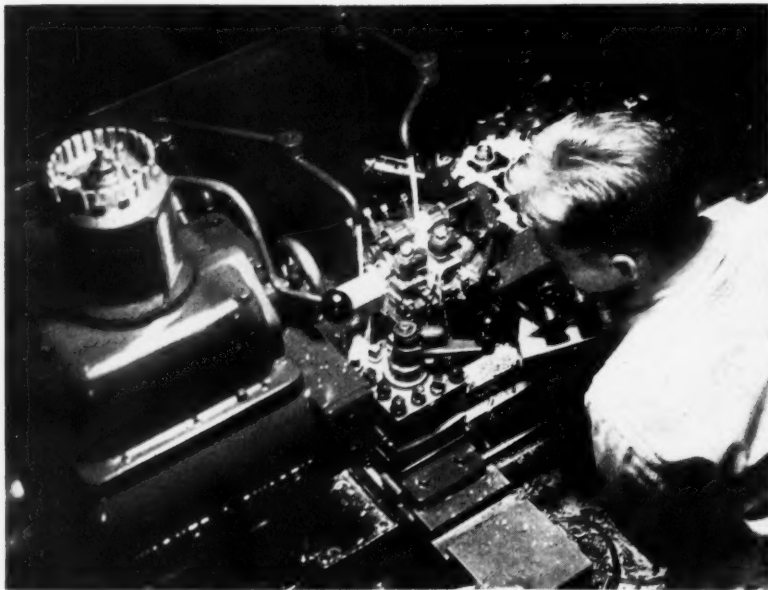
Multiple-cutter Turner with Roller Back-rests Designed so that all Cutting Strains are Taken up within the Tool
